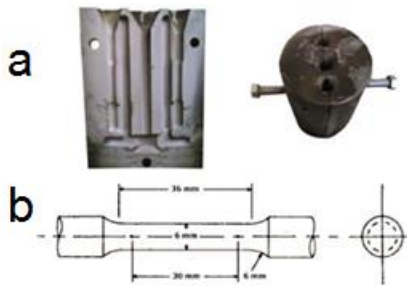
(a) Casting mold and (b) tensile sample dimensions.
